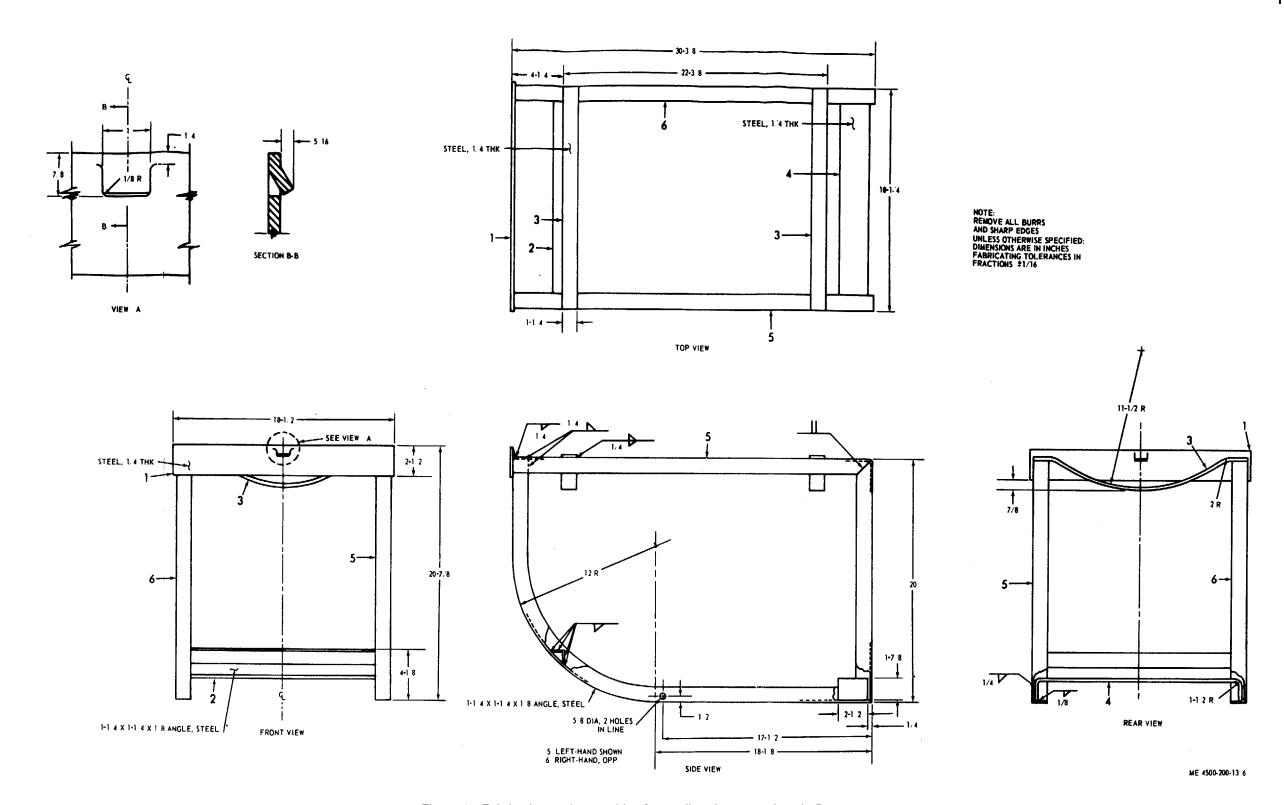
Fabrication and assembly of 55-gallon drum stand, style B.
